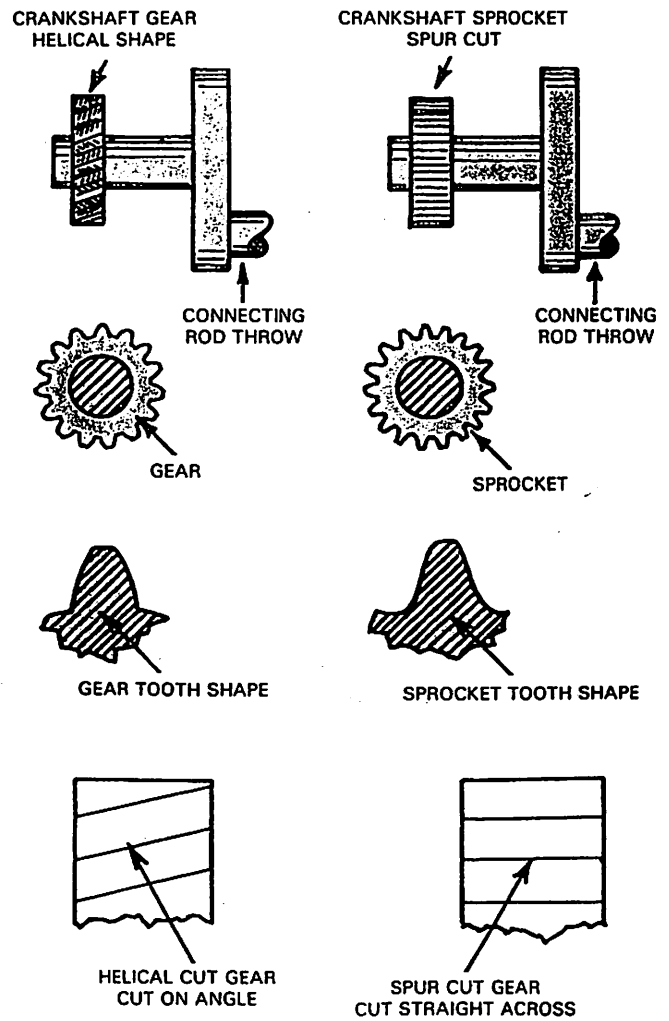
Timing gear drive gear on crankshaft; also timing chain (or belt) drive sprocket on crankshaft.
